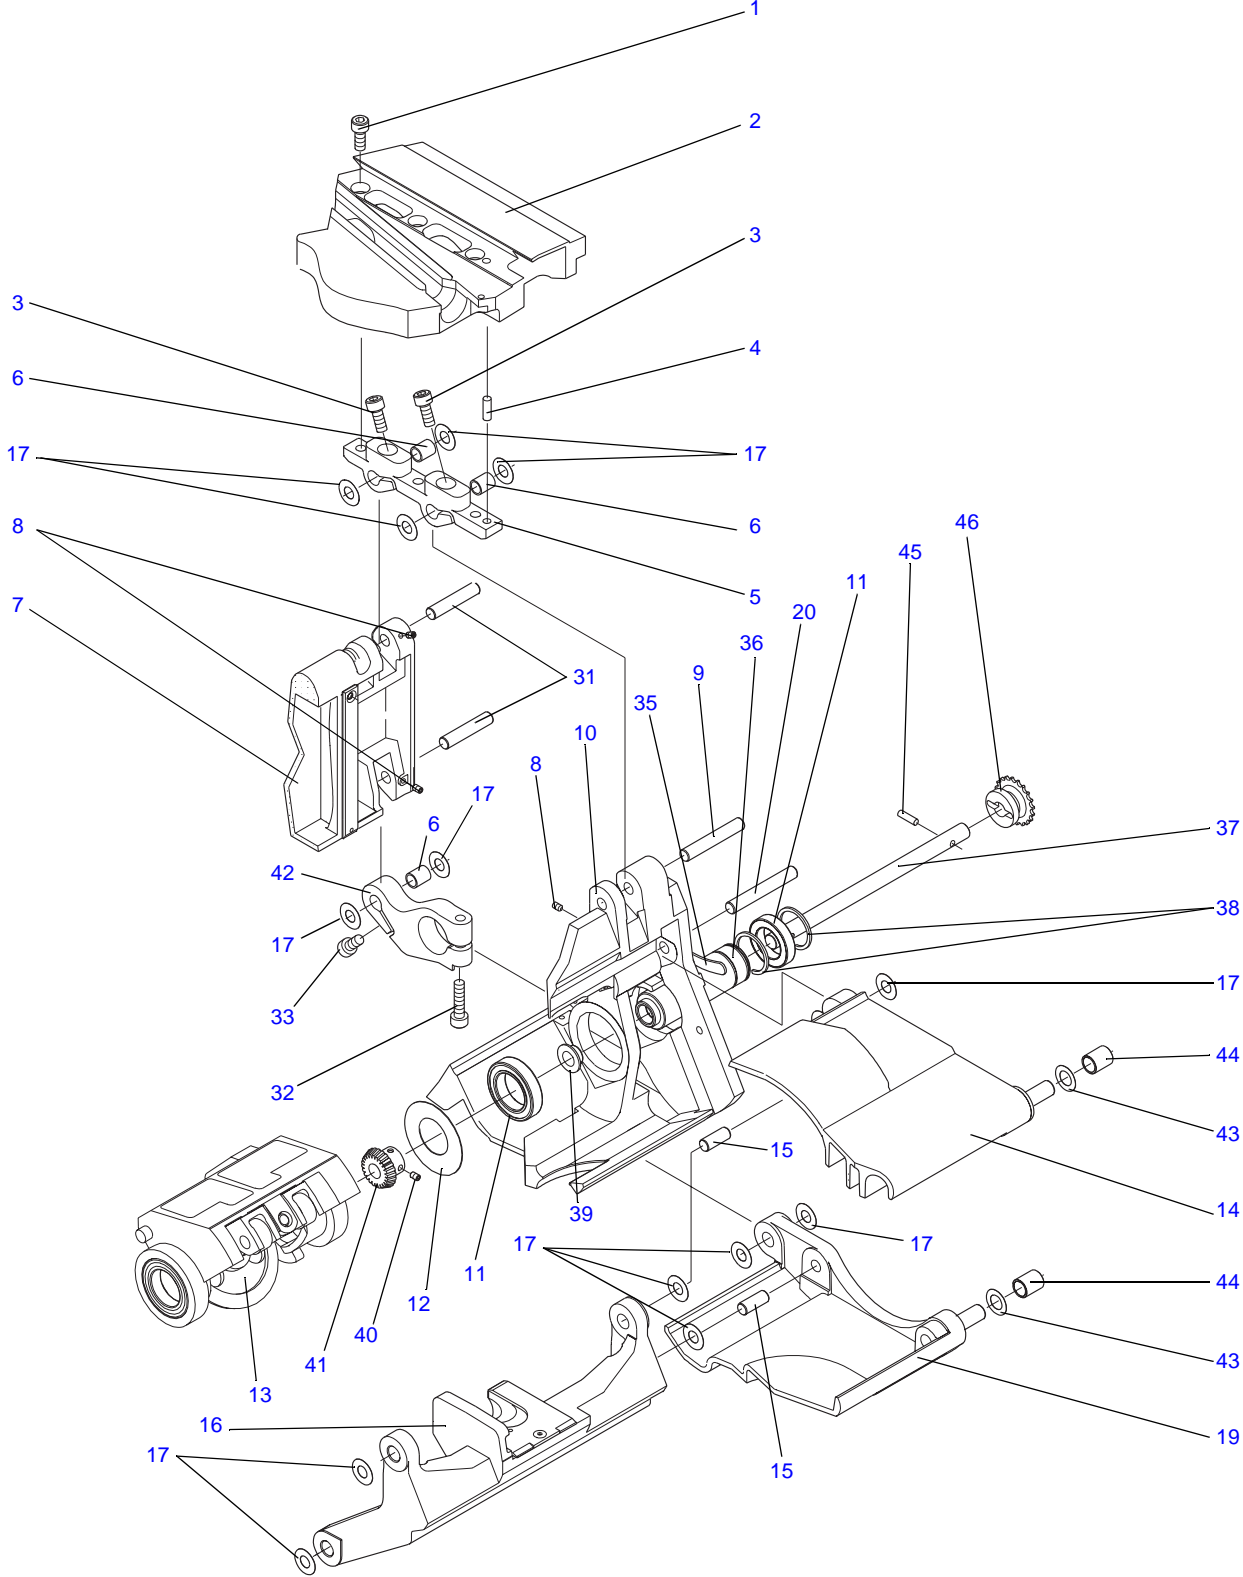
Vector 70/70H Pan and Tilt Head - Brake Lever Support Cap Assembly (Cont)
